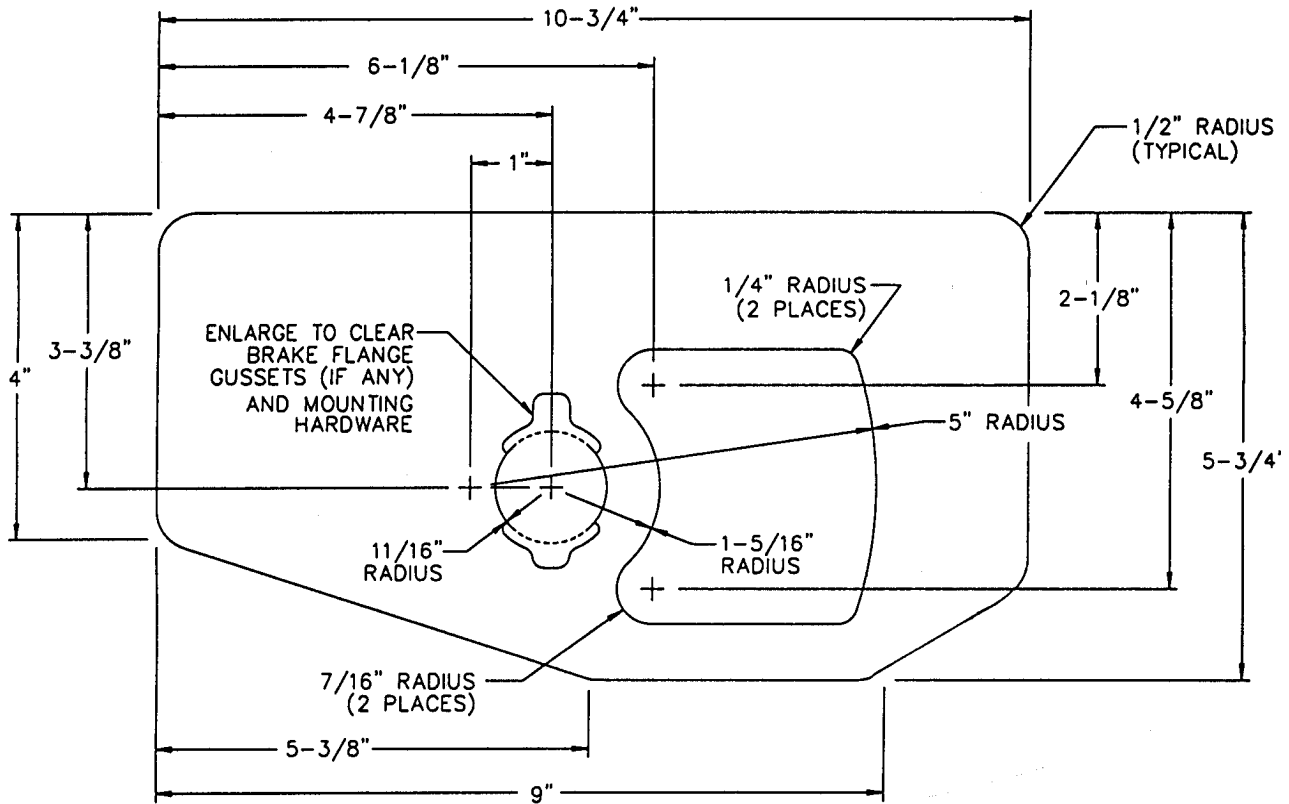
Revised Wheel Pant Backing Plate Aft Edge Contour
